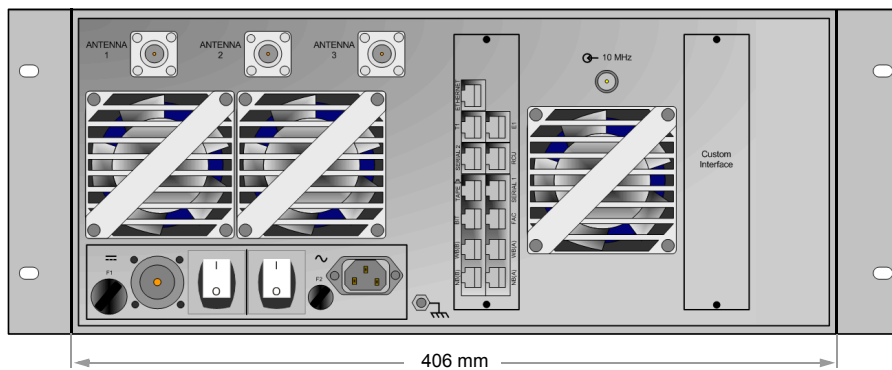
Radio Chassis Width (for Slide Fixing)
